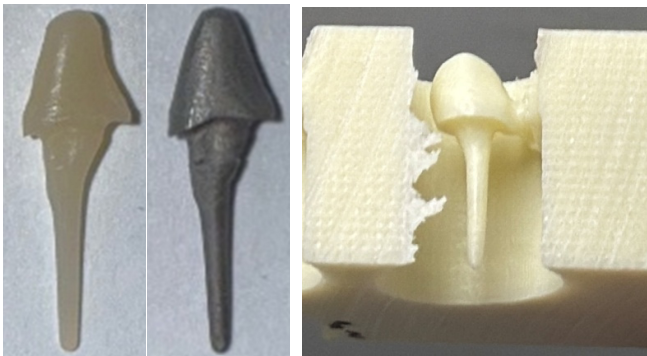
CPC: Residualfree burnable resin PC and cast PC (left). CAD/CAM PC: Milled PC out of glasfibre reinforced composite. (right).
